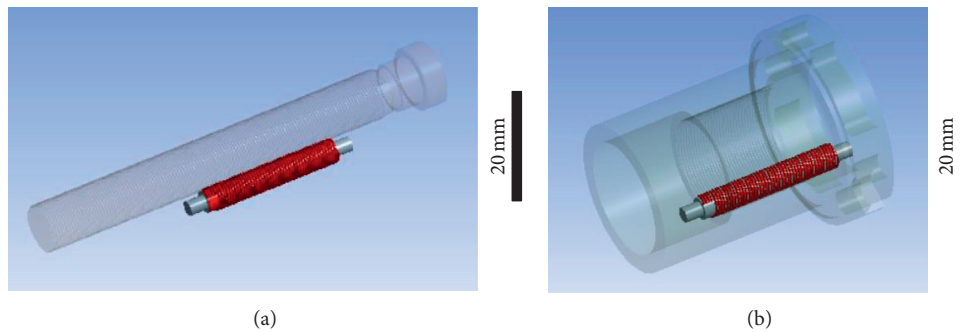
Contact mechanisms of (a) roller-screw mechanism and (b) roller-nut mechanism.
